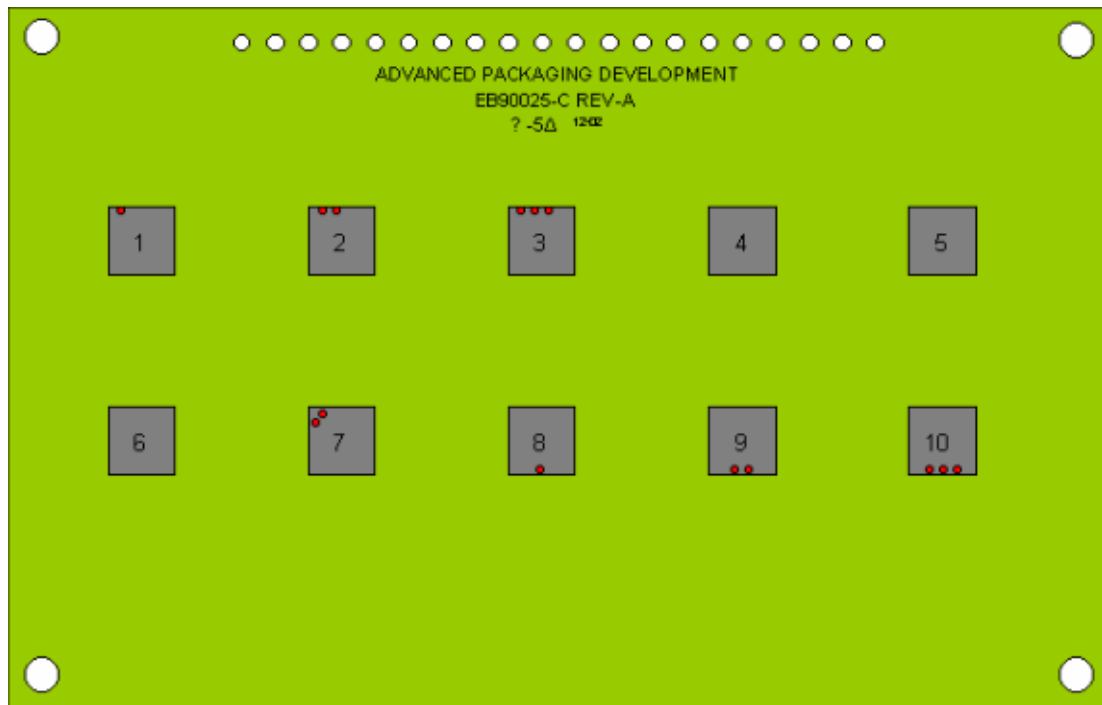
Plan for Construction of Flip Chip Specimens with Open Solder Joints
